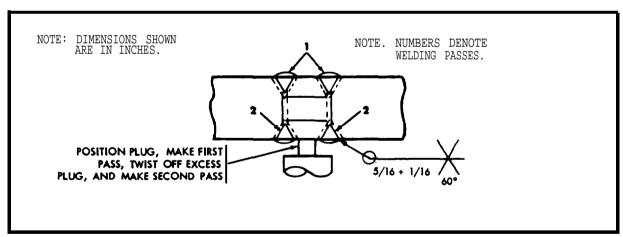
TIG (tungsten-inert-gas) process of welding.
